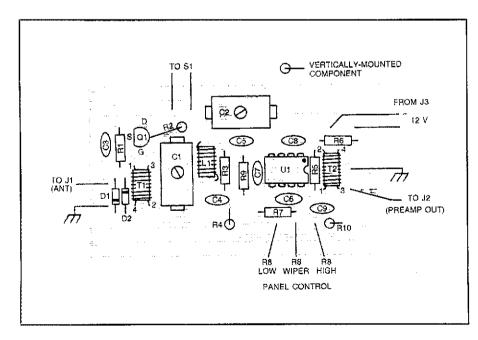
Parts-placement guide for the preamplifier. Parts are placed on the nonfoil side of the board; the shaded area represents an X-ray view of the copper pattern.
